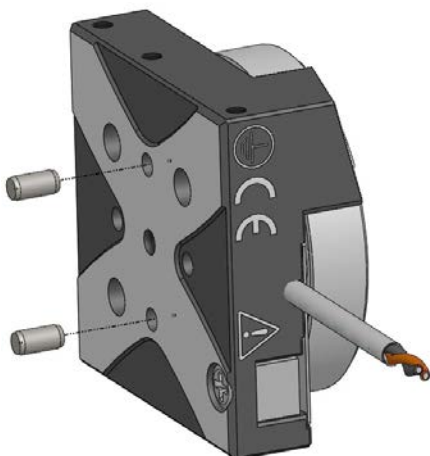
Bottom of the Q-622.900: Two of the four available locating holes can be used for aligning on a surface
